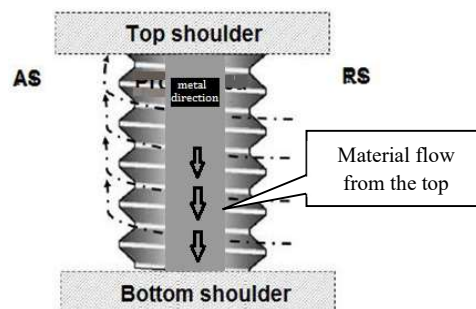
Material flow in welding zone by tool threaded with two flat faces.
